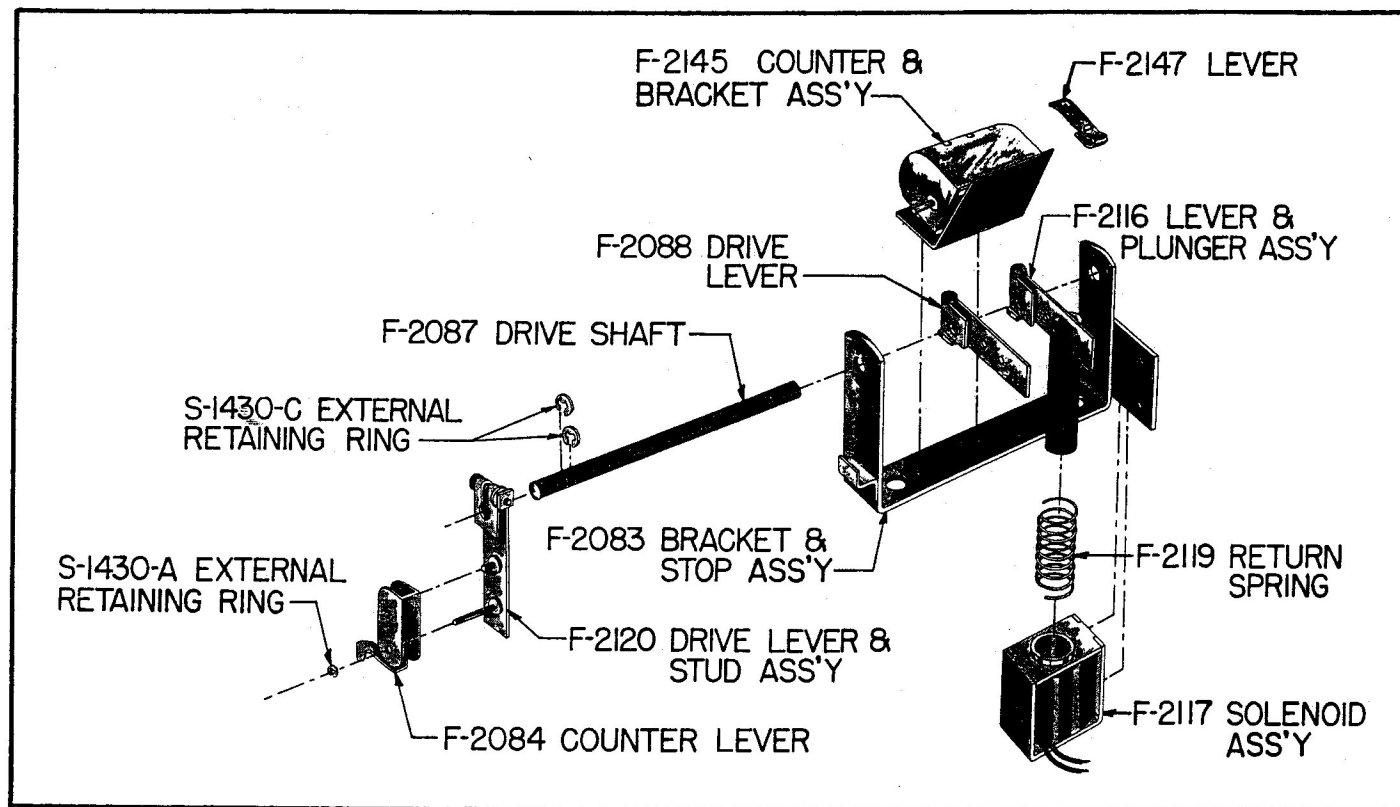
COUNTER ACTUATOR PARTS GROUP
